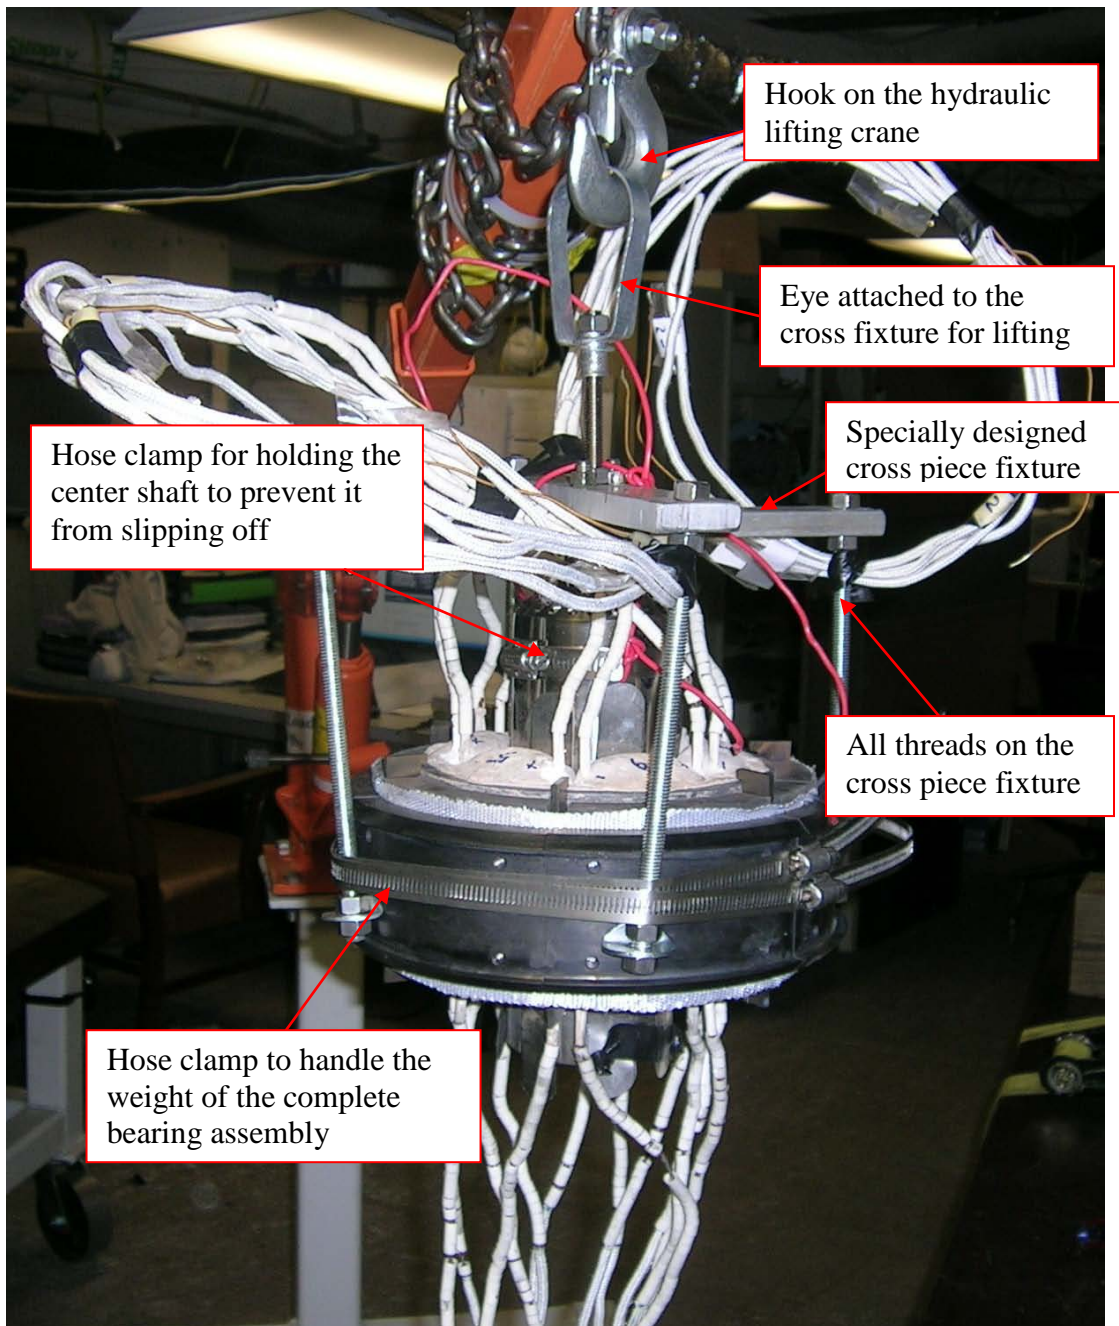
Bottom radial bearing lifted and hauled by a specially designed fixture for easy handling
